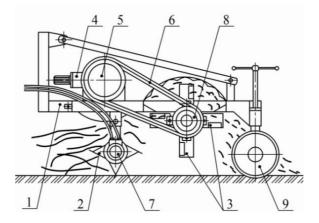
The design and process setup of the grape vine and fruit tree waste wood chopper (sectional side view): 1 - frame; 2 - pruned wood pick-up unit; 3 - chopping unit blades; 4 - drive gear; 5 - intermediate gear; 6 - belt transmission; 7 - pick-up unit drive hydraulic motor; 8 - free-wheel clutch for chopping unit drive; 9 - gauge wheel with height adjustment mechanism.
